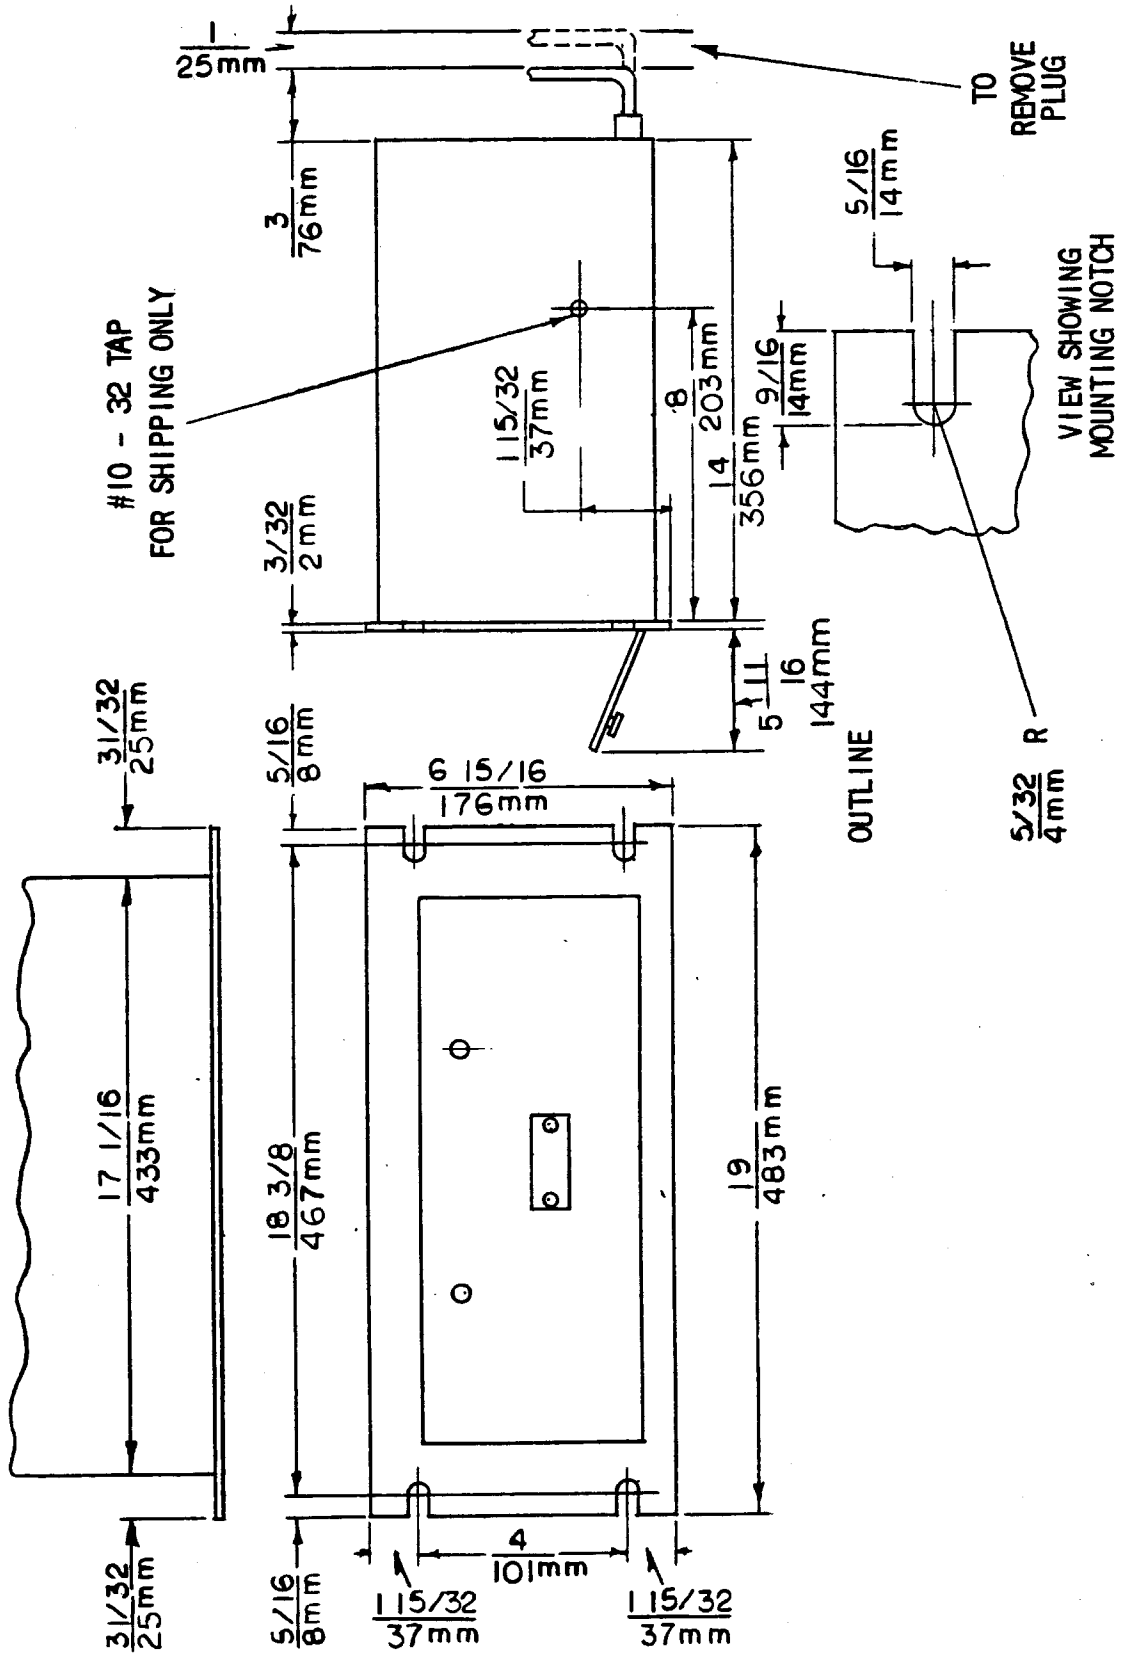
(0227A2037-0) Outline and Mounting Dimensions for the SLA51Y Relay
